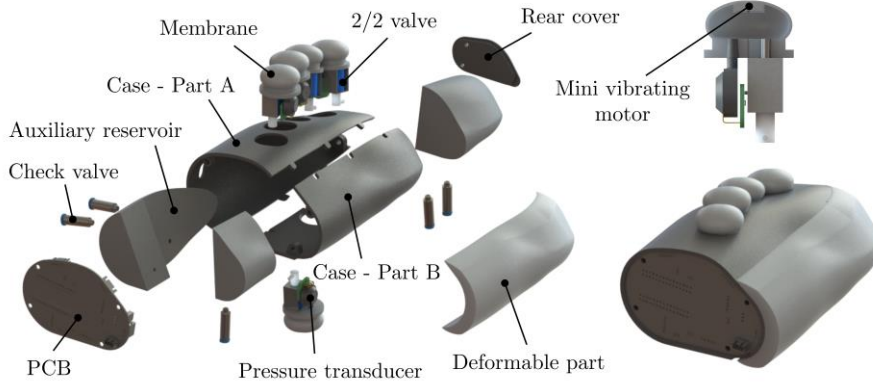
Exploded view of PAL-HAND.Q (the battery pack is not represented)
